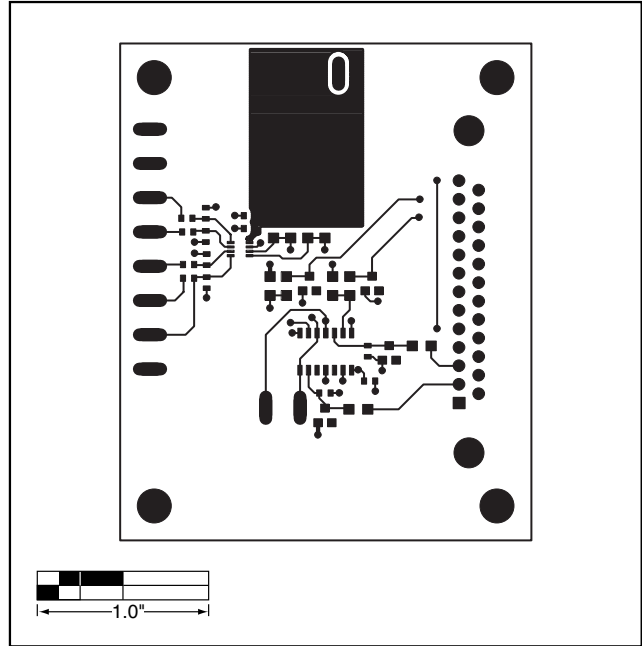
MAX1036 EV Kit PC Board Layout—Component Side
